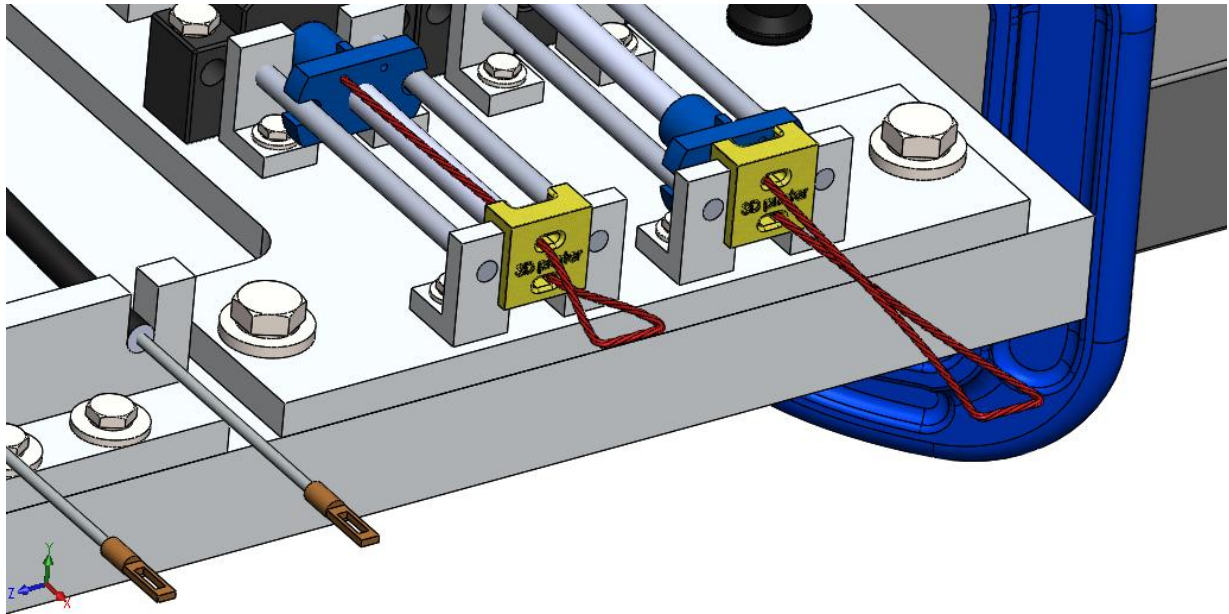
String guide assembly with the screw nuts. Modified from [4].
